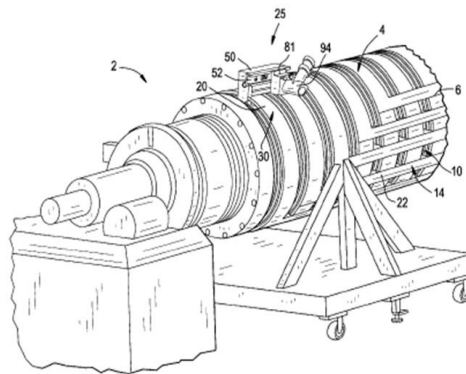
Cutting Tool vs. Rotor Forging Size Comparison
